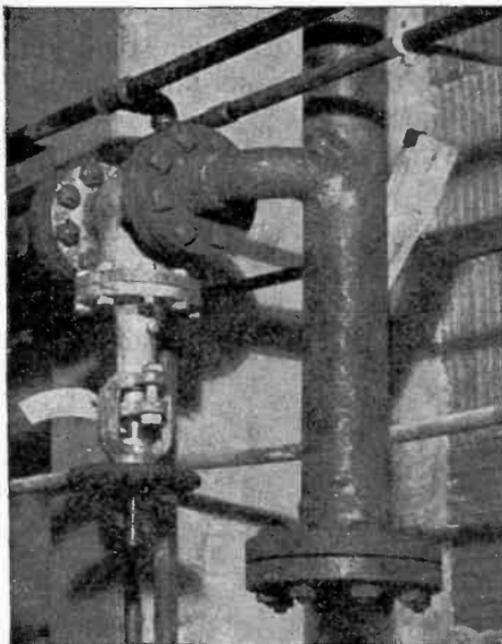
Gas compressor installation showing welded joint tube turn fittings in suction and discharge connections.
